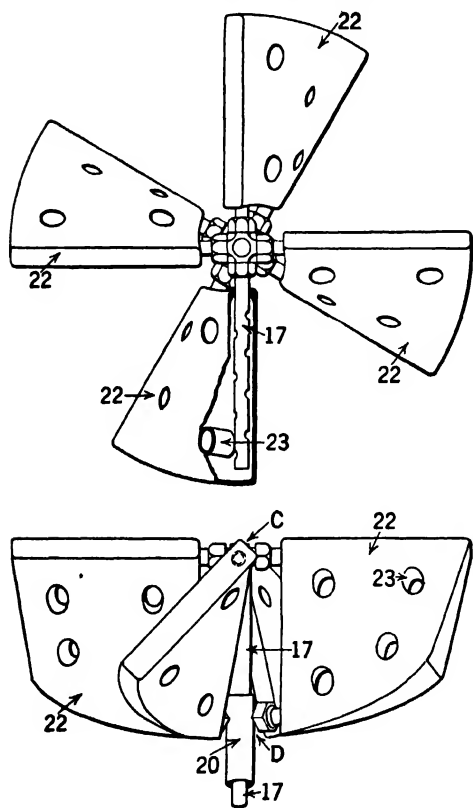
DETAILS OF THE HEATING AND COOLING PADDLES.
